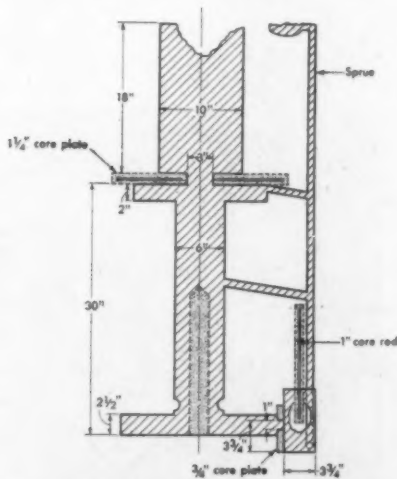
MOLD SHOWING RELATIVE DIMENSIONS OF RISERS AND RISER CONNECTIONS AND ATMOSPHERIC RISERS. CASTING INVOLVED STEP GATES, WILLIAMS RISERS, GATING THROUGH THE RISER AND KNOCK-OFF RISERS. READER SHOULD TRACE THE FREEZING FROM THE THINNEST SECTIONS AND COLDEST METAL TO HEAVIEST SECTION AND HOTTEST METAL IN THE RISERS.
